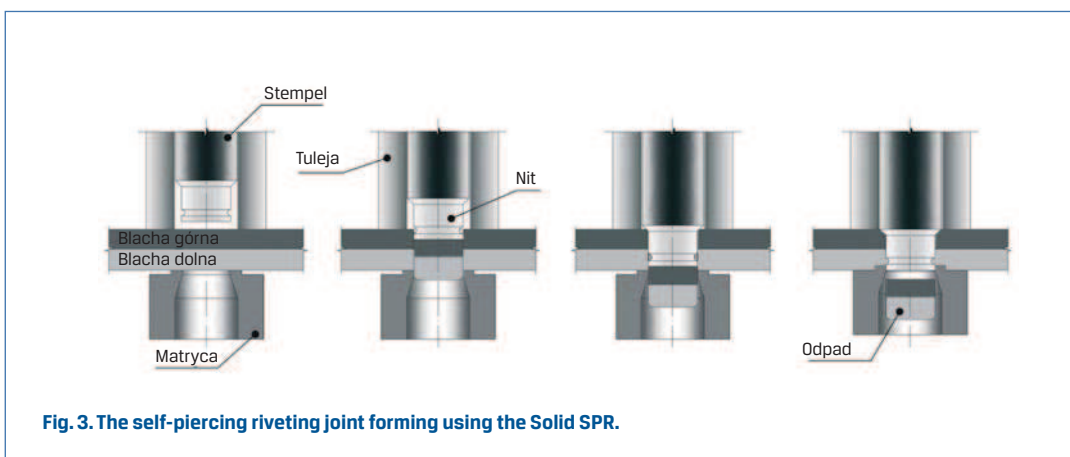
The self-piercing riveting joint forming using the Solid SPR.
